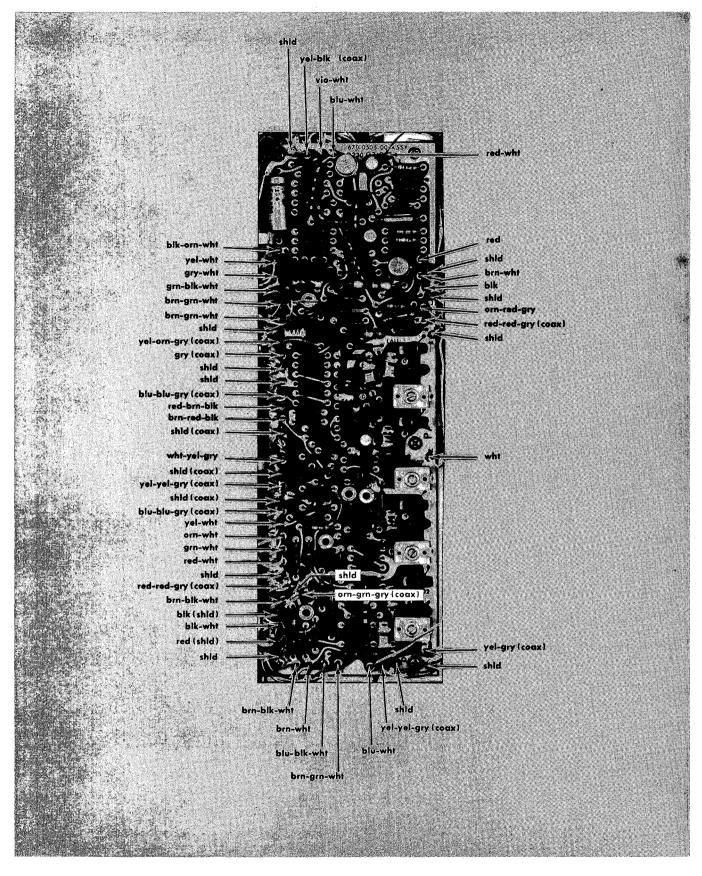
IF Control board assembly. Wiring color code to pin connector.
